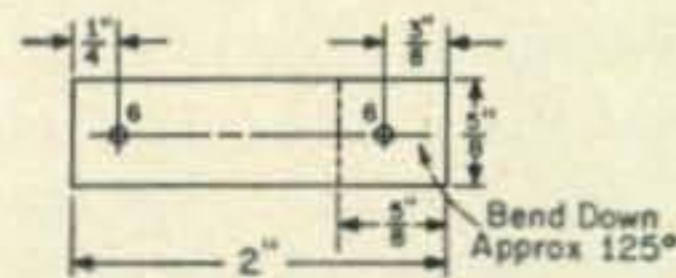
Commutator contact bar mounting brackets. Two are made from 20 gauge galvanized iron.
